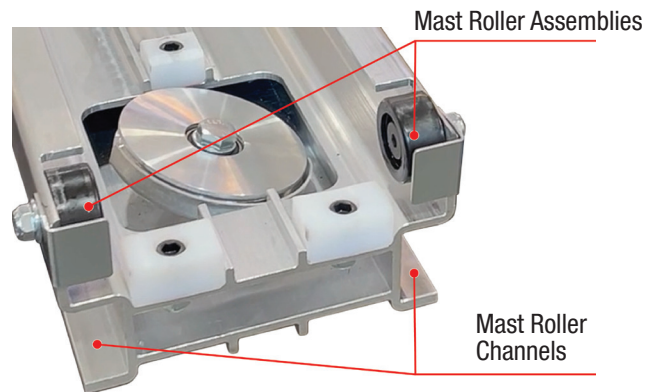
Mast Roller Assemblies and Mast Roller Channels
